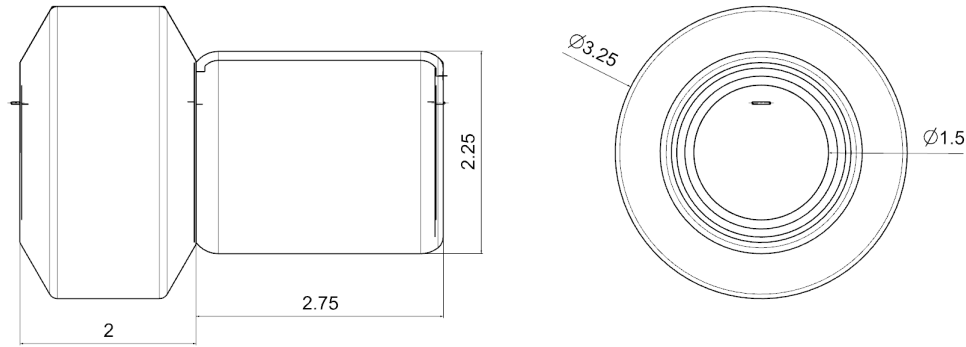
Dimensioned Drawing of Microgravity Airlock (meters)
